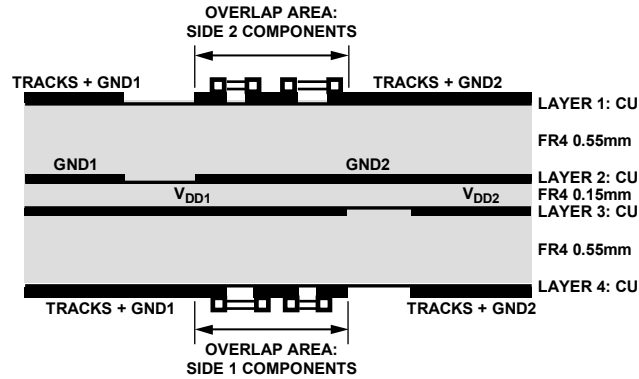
Cross Section of Proposed Layout of ADuM1xxx PCB Illustrating Side 1 and Side 2 Components on Overlap Area with V_{DD} to GND Dielectric of 0.15 mm
